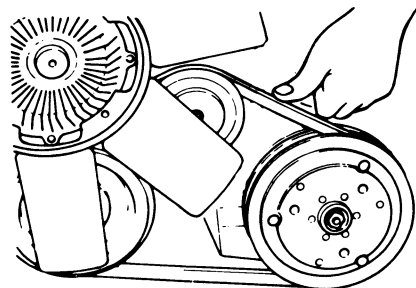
Cooler compressor belt tension (for 710 model only)
